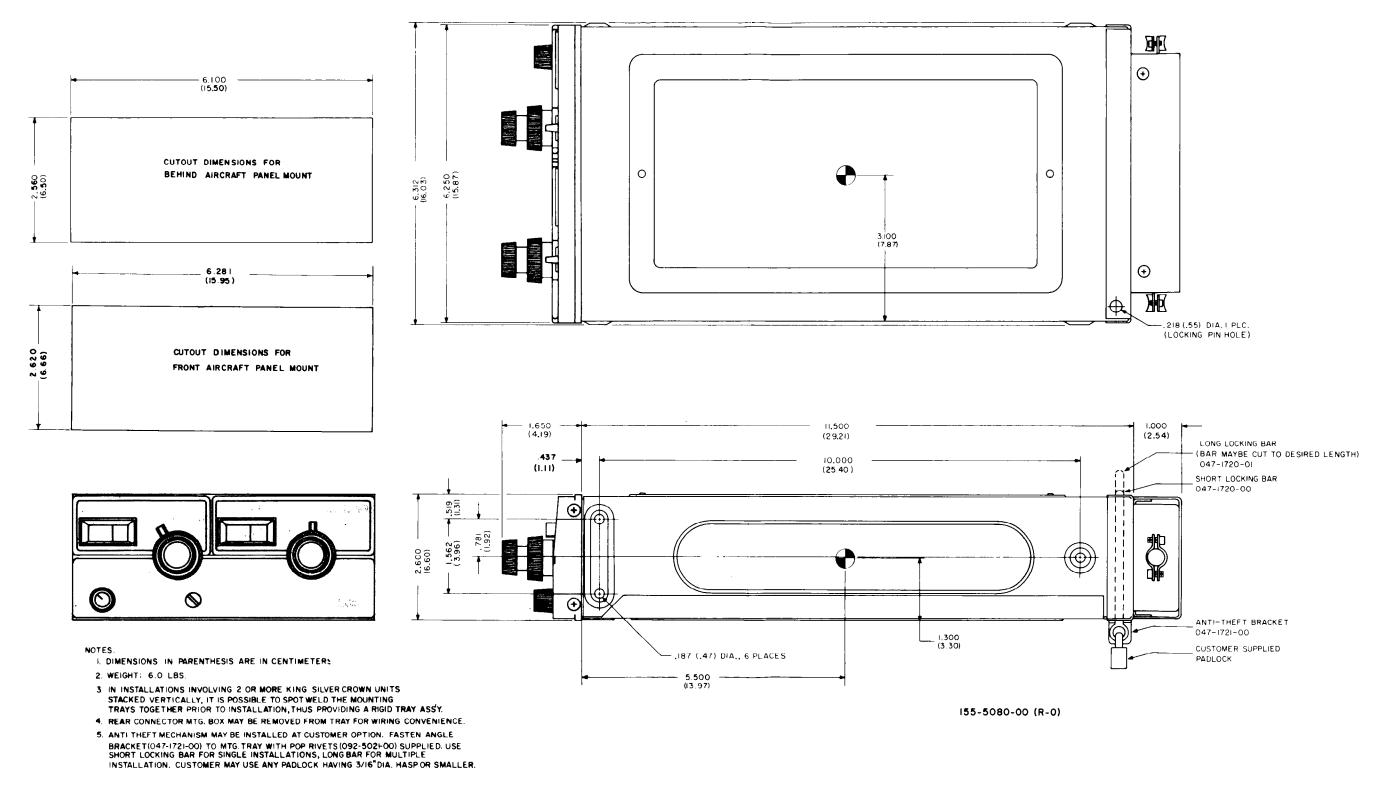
KY 195 OUTLINE AND MOUNTING DRAWING
